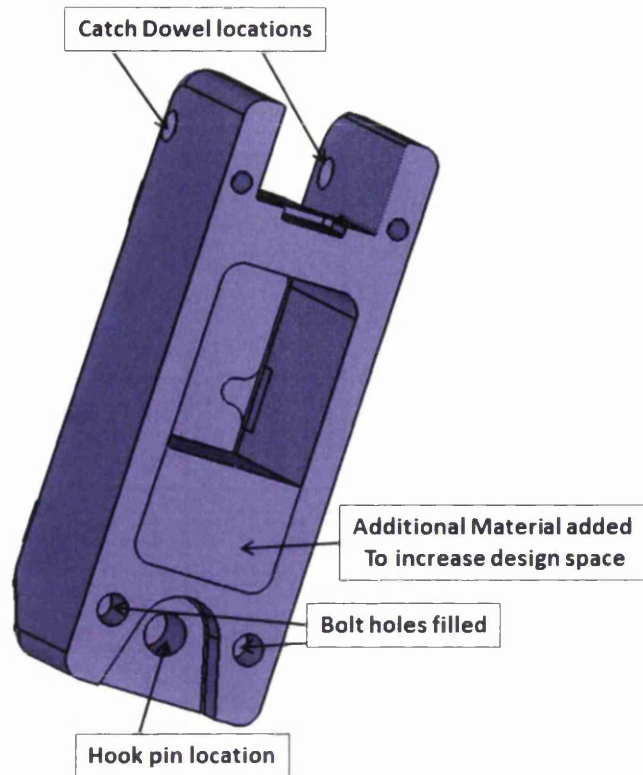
Casing B design domain showing filled bolt holes and modified switch block cavity
